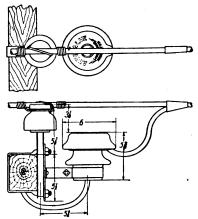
Side and Top Views of 2500-Volt Arrester with Form C. Mounting Bracket and Pierce Clamp Pin
